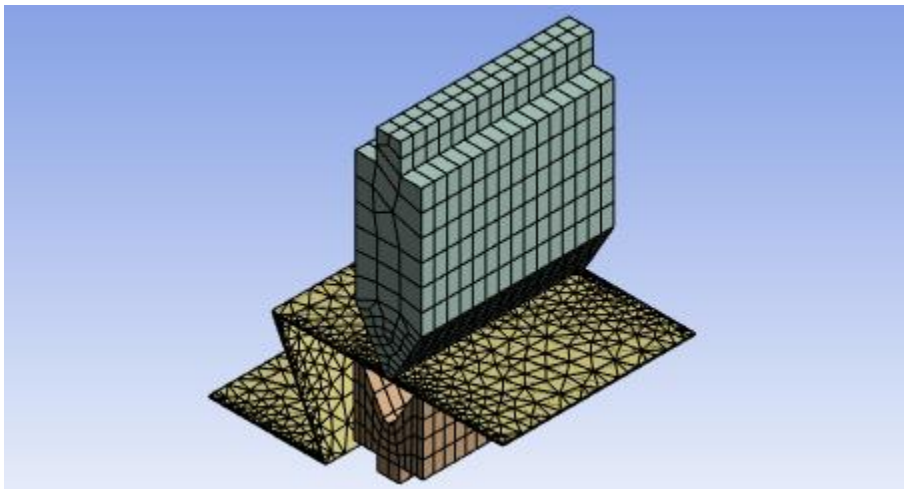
Finished mesh for punch, die and sheet assembly (3rd bend)
